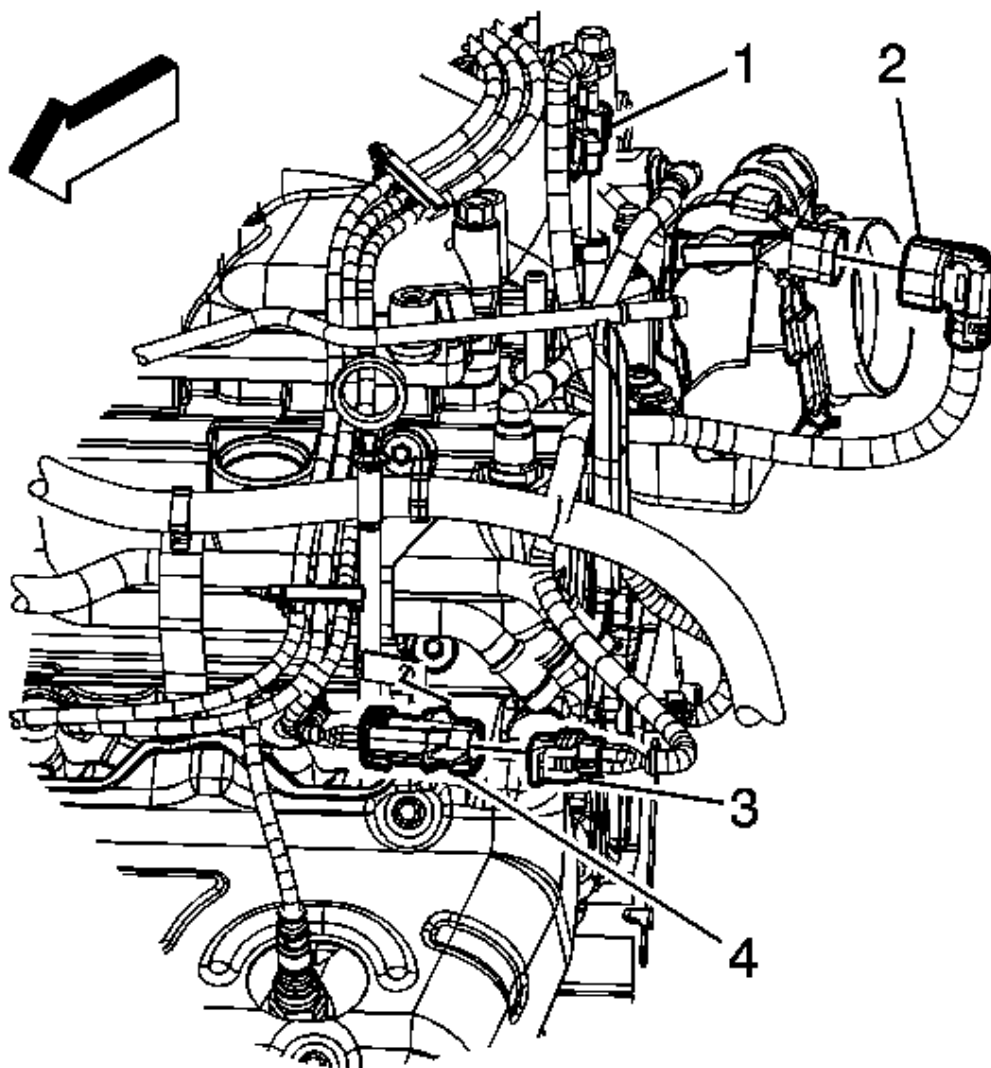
EVAP Canister Purge Solenoid, ETC & HO2S Connectors
